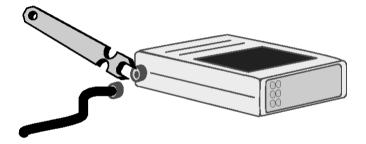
Tightening the Cable(s) to the Connector(s)
